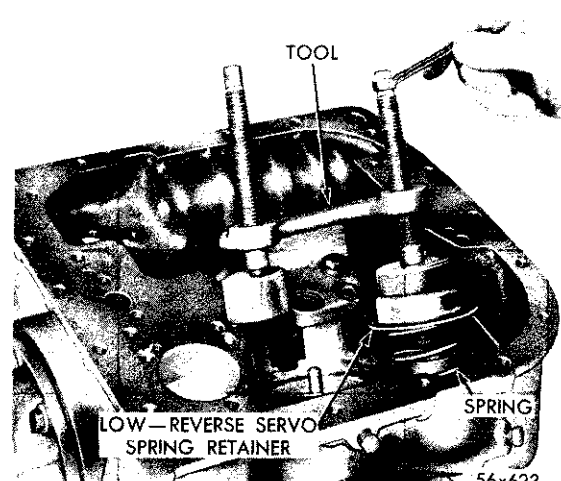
Compressing Low and Reverse Servo Spring and Retainer
